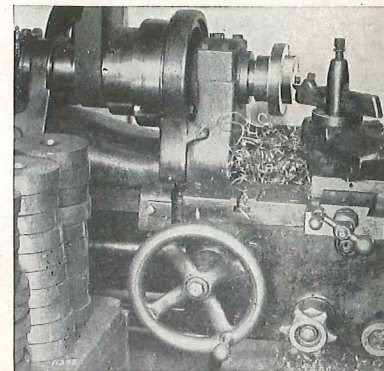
shows a steel disc held to the face plate of the lathe by a draw-in chuck attachment while being machined.
